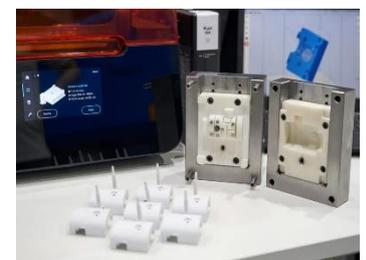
Mould development with the use of a resin 3D printer (Formlabs, n.d.)
